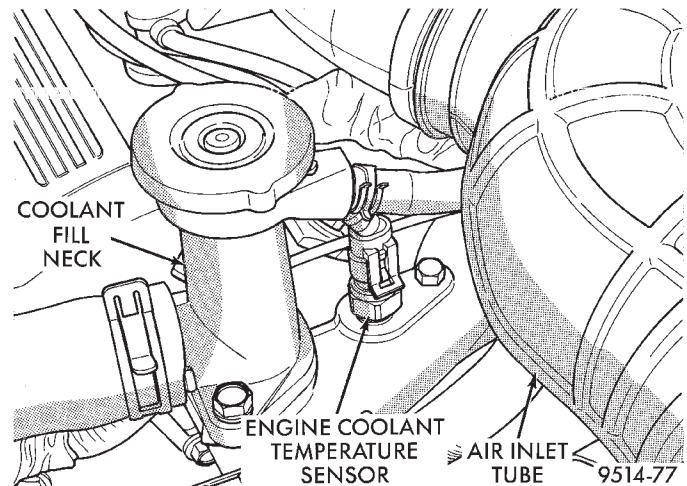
Engine Coolant Temperature Sensor—2.5L Engine
